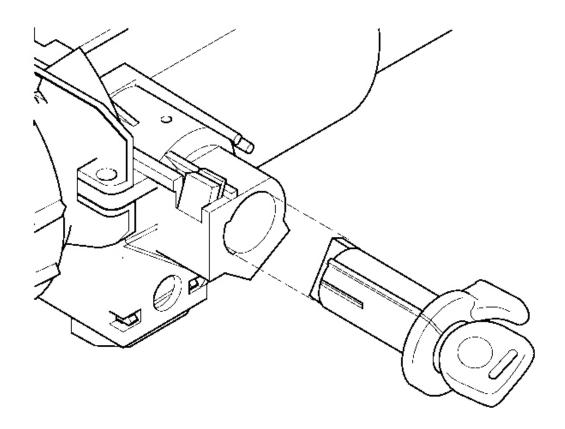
View Of Lock Cylinder At Lock Cylinder Housing Courtesy of GENERAL MOTORS CORP.
